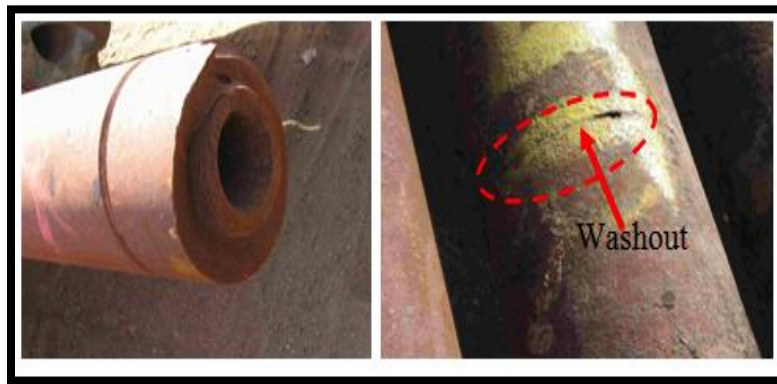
Drill string failures: (a) Stem separation and (b) Washout
